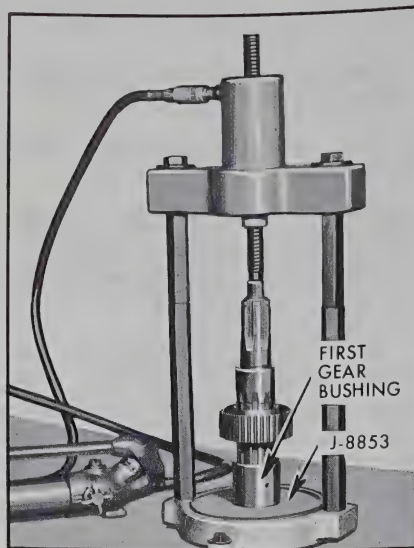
Installing First Speed Gear Bushing Using J-8853
